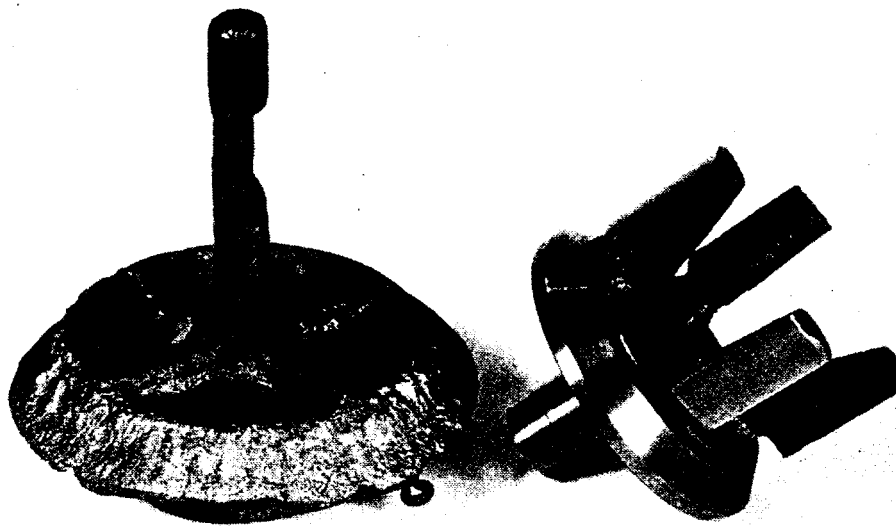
CORRODED ADMIRALTY TYPE 3 IN. DIAMETER VALVE DISC IN GUNMETAL TOGETHER WITH AN R.A.N. TYPE 2 IN. VALVE DISC IN MONEL
